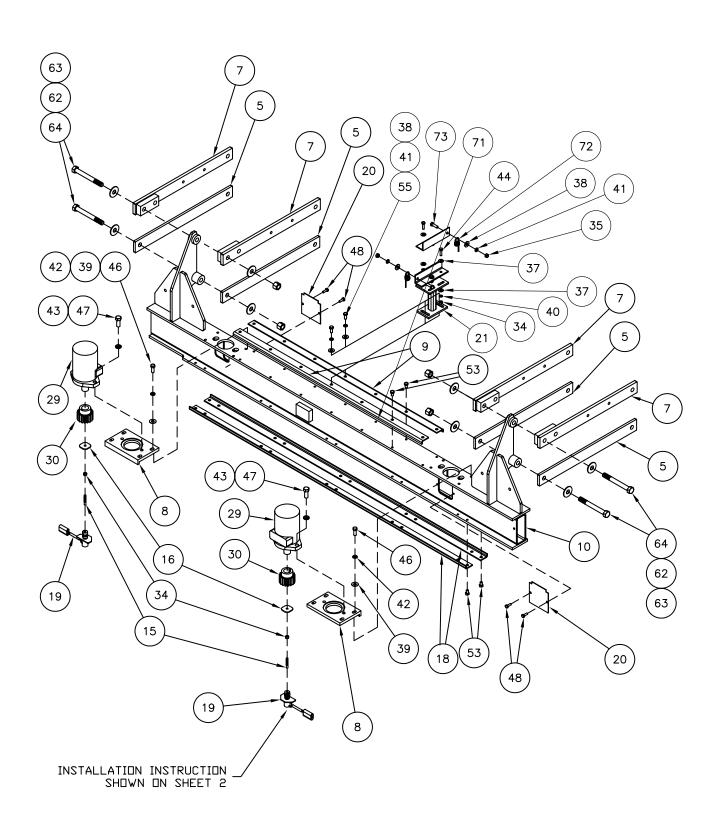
SPRAYBAR ASSEMBLY, 18 FOOT (SHEET 1 OF 5)
